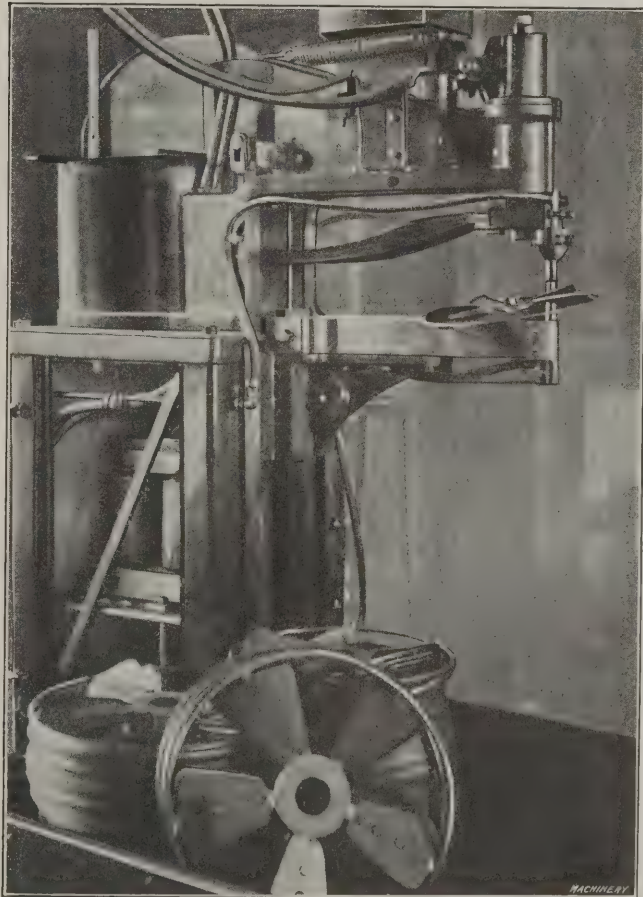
Welding Fan Blades on a National Spot Welder
